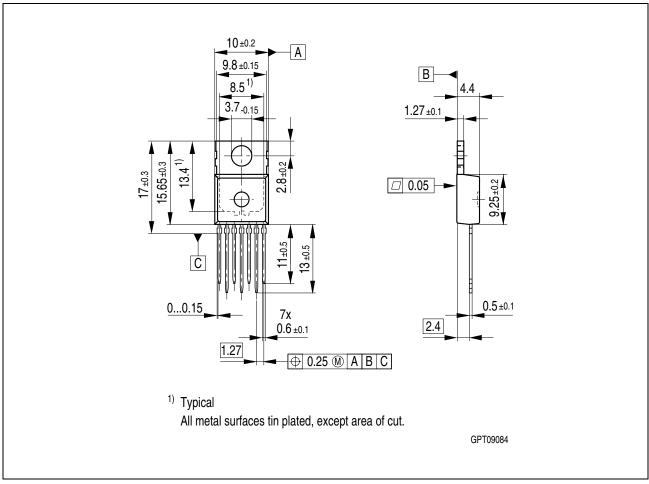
P-TO220-7-12 (Plastic Transistor Single Outline)
